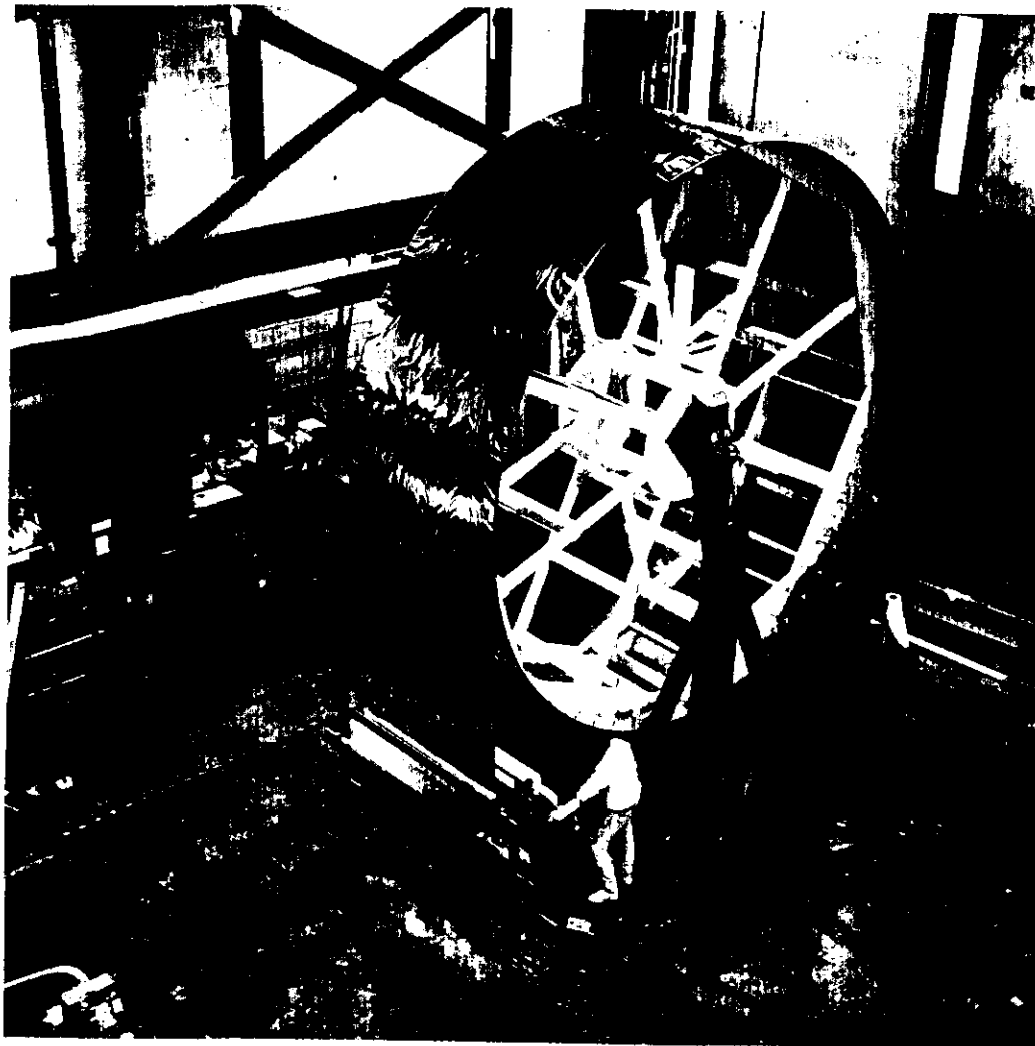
Large Diameter Winding Apparatus for MLI Blanket Production
